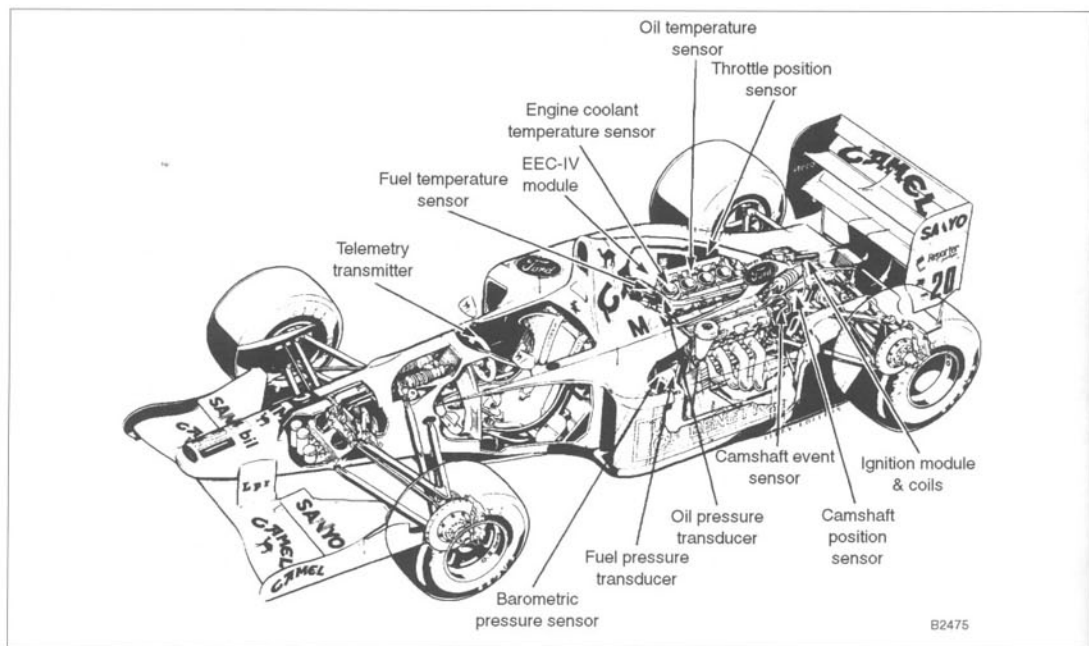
Ford F1 engine uses EEC-IV engine control. Control module is similar to one used on production cars.
